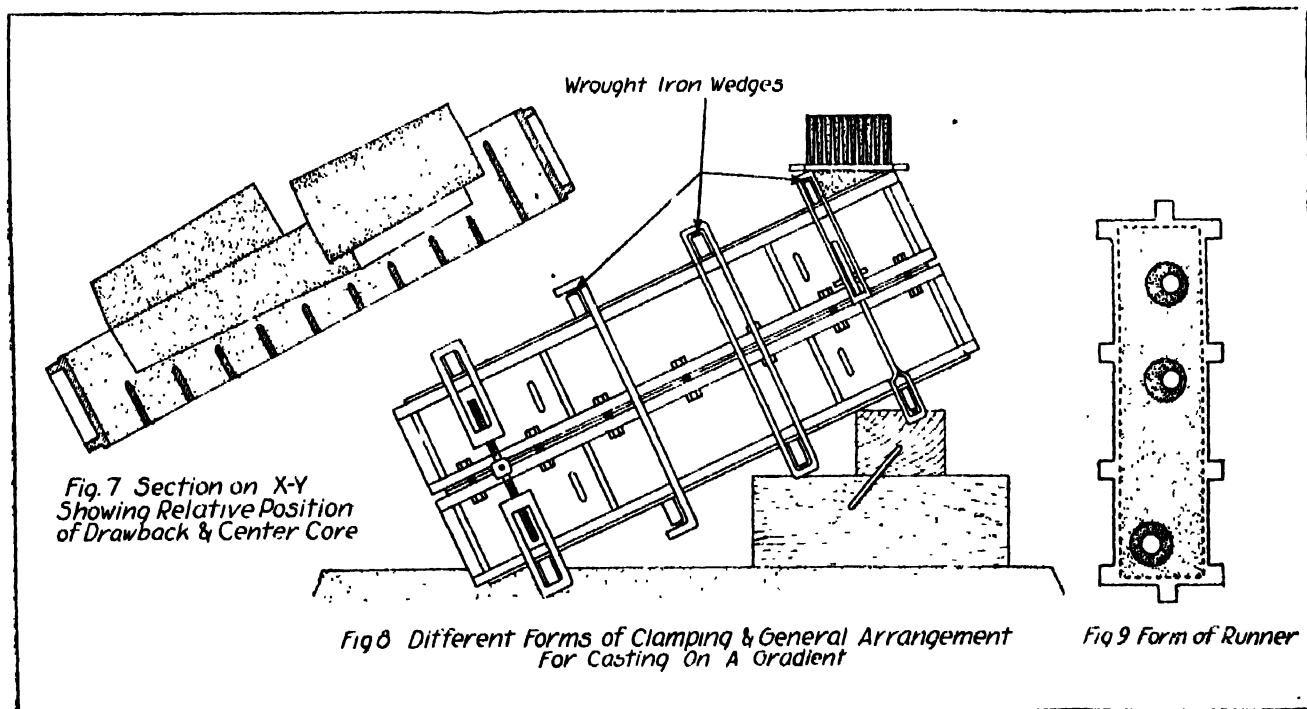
SECTION ON X Y SHOWING RELATIVE POSITION OF DRAWBACK AND CENTER CORE FIG. 8 - DIFFERENT FORMS OF CLAMPS AND GENERAL ARRANGEMENT FOR POURING CASTING ON AN INCLINE FIG. 9 FORM OF RUNNER
